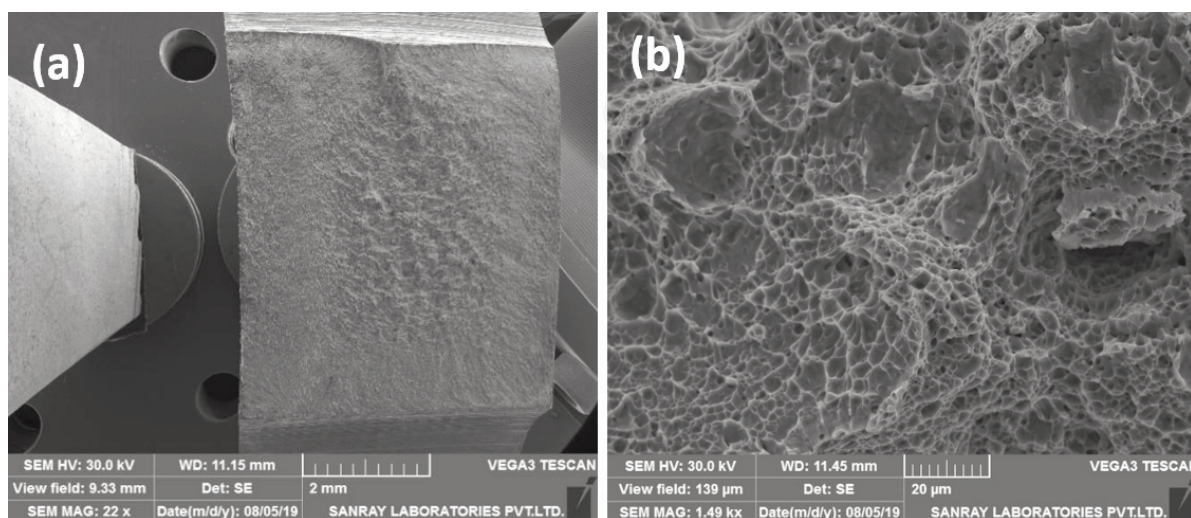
Fractography of the tensile test specimens of EN36C obtained at a) 20X; b) 1.5kX
